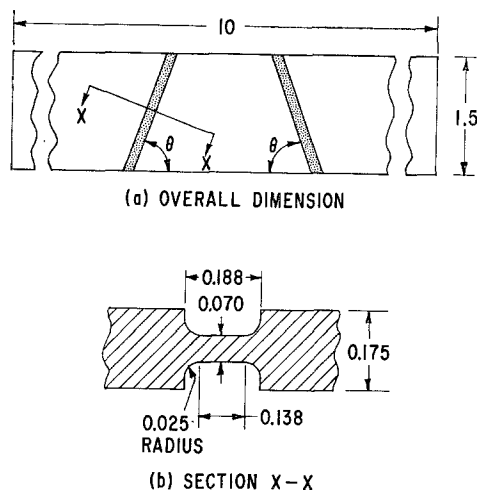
Details of sample geometry: (a) overall view and (b) cross-section of the gauge, all dimensions in inches.
